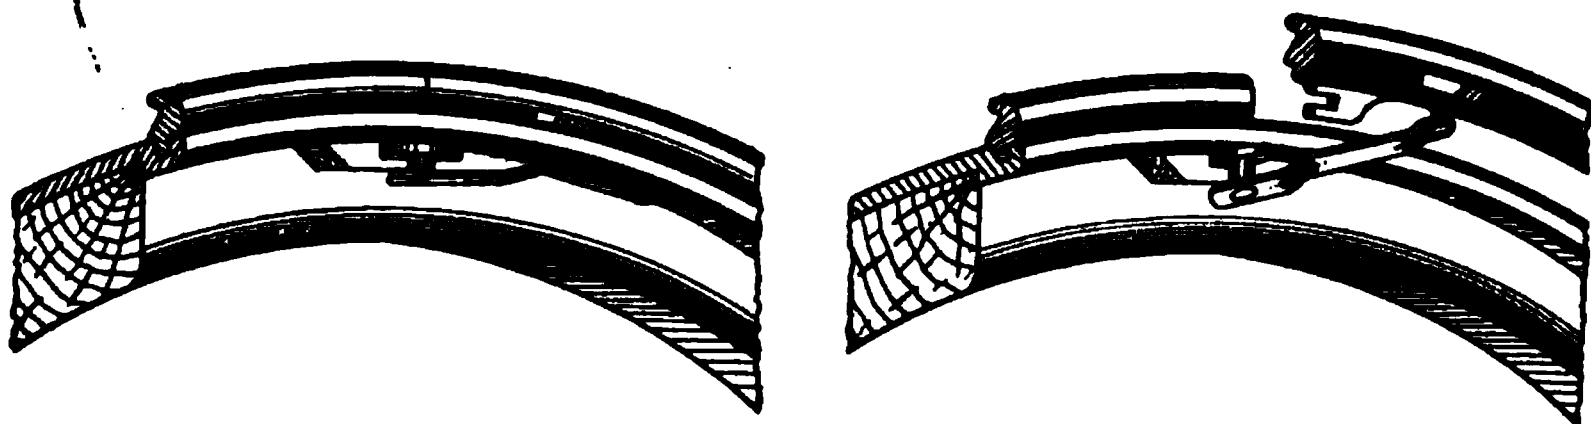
Latch Used for Locking Single Combination Ring which Replaces Former Side Ring and Locking Ring
